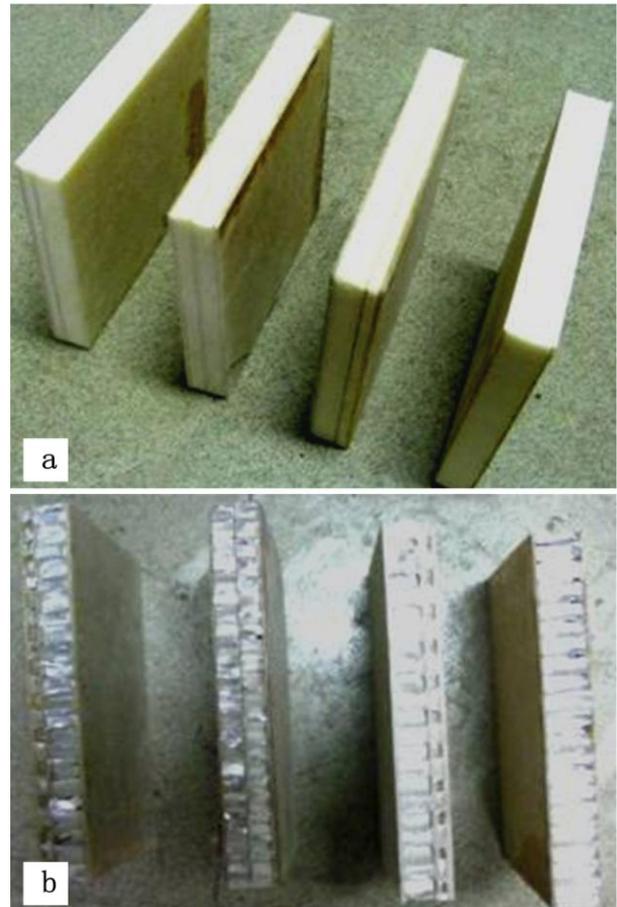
Fabricated specimens: (a) Foam sandwich structures; (b) Honeycomb sandwich structures.
